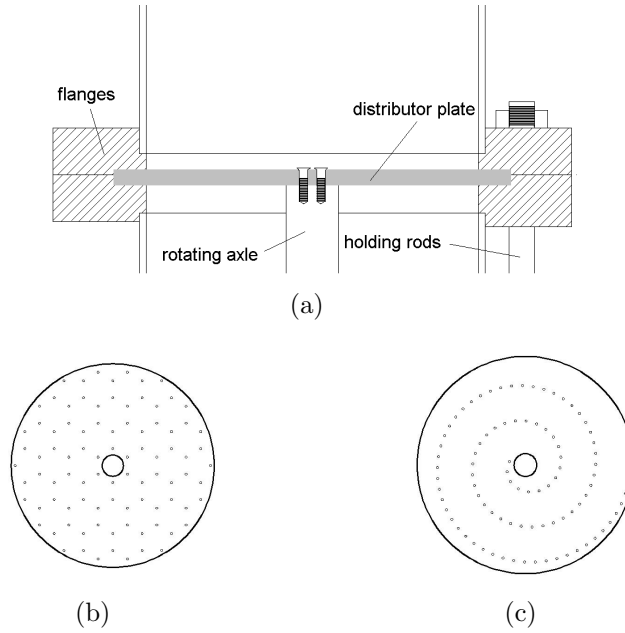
(a) Detail of the mechanical set-up of the rotating distributor (b) Uniform pitch distributor (c) Spiral pitch distributor.
